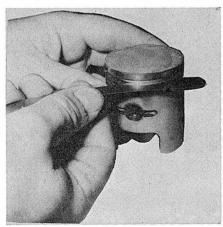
Ring side clearance in groove should be measured with gage as shown. Clearance should be within recommended limits and the same all the way around piston.
